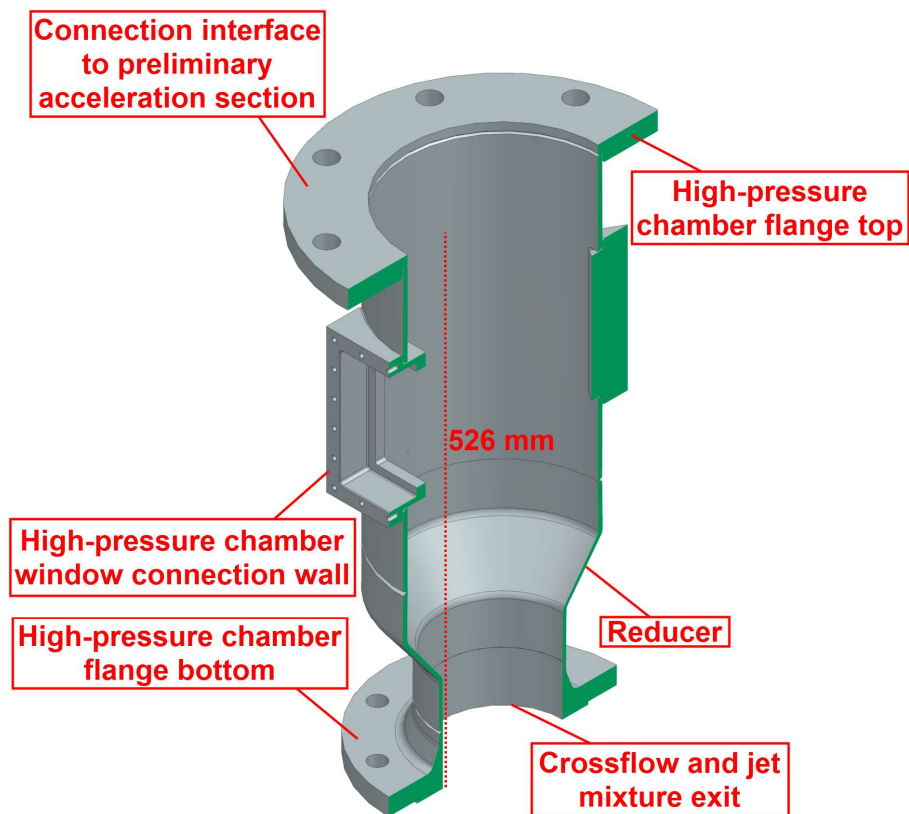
High-pressure chamber assembly, PDPA (cross-sectional view 1).
